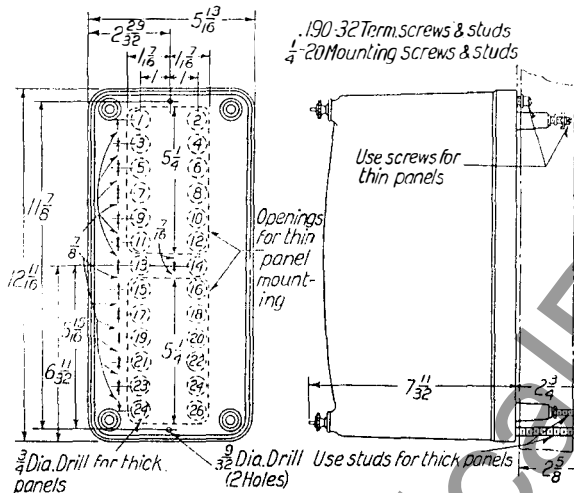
OUTLINE, PROJECTION MOUNTING, 3-ELEMENT METER. Either drill only holes numbered as per connection diagram or cut rectangular holes as indicated by dotted lines.
